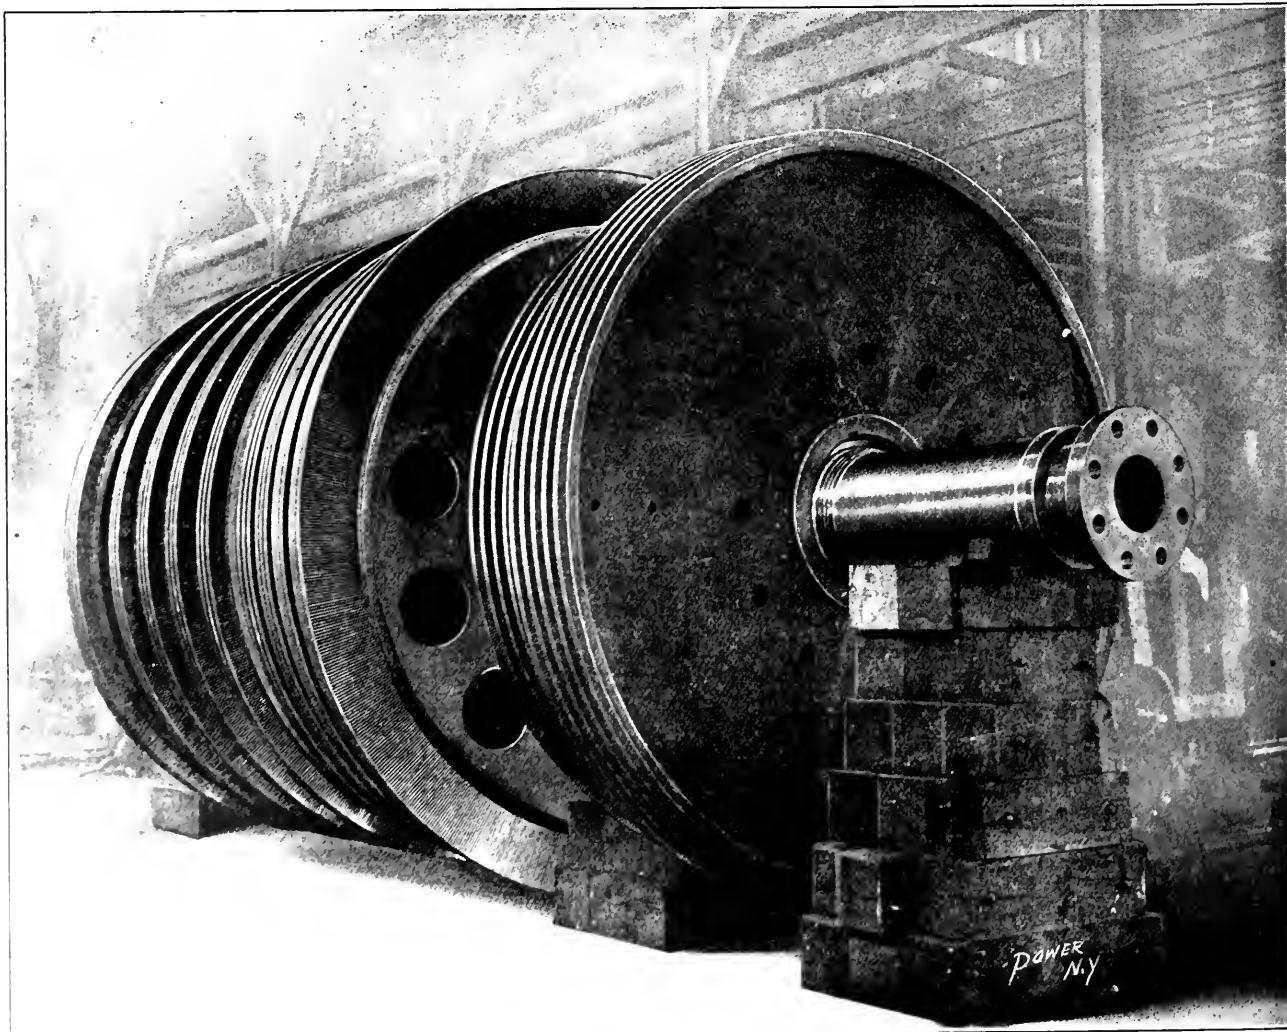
ROTOR, SHOWING REVERSE WHEELS
